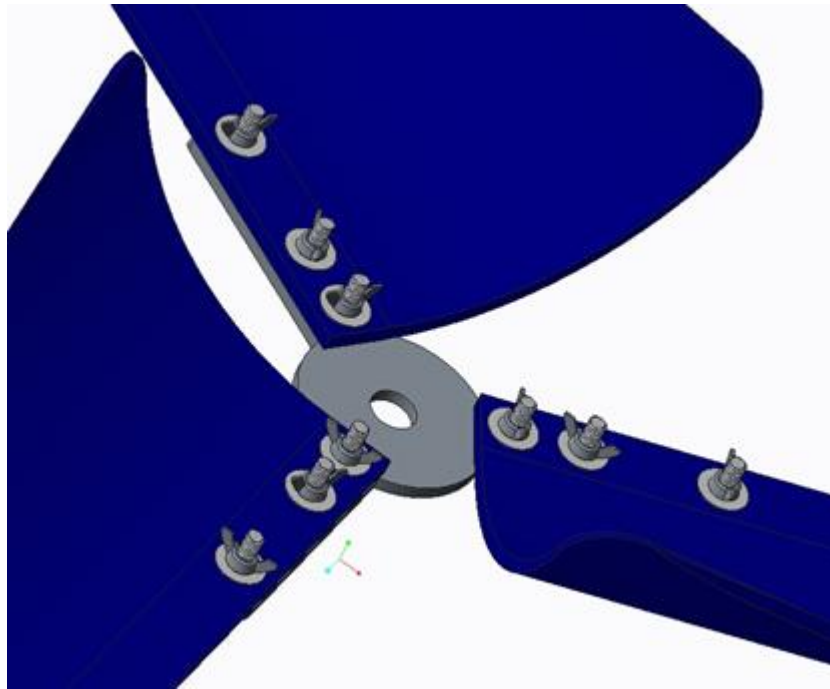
Final hub assembly that will be used to mount the blades to the Portable Wind Turbine Prototype.
